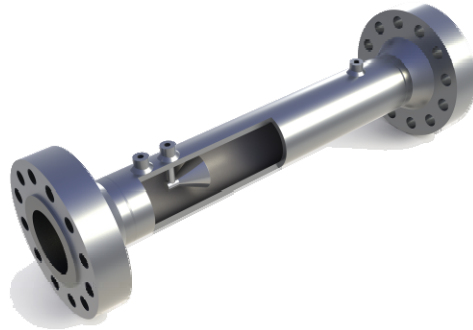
A drawing of a cone meter with cut away of the wall to expose the cone assembly.
